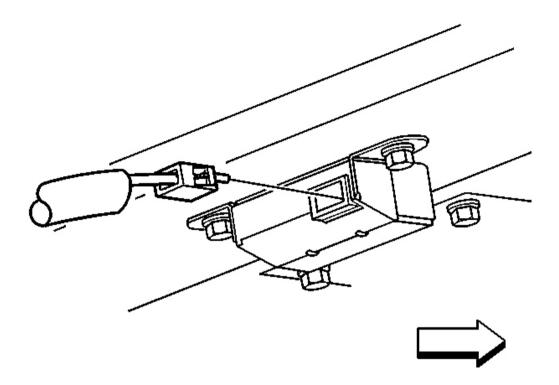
Rear Lift Window Antenna Cable Connector & Extension Cable At Antenna Buffer Courtesy of GENERAL MOTORS CORP.
